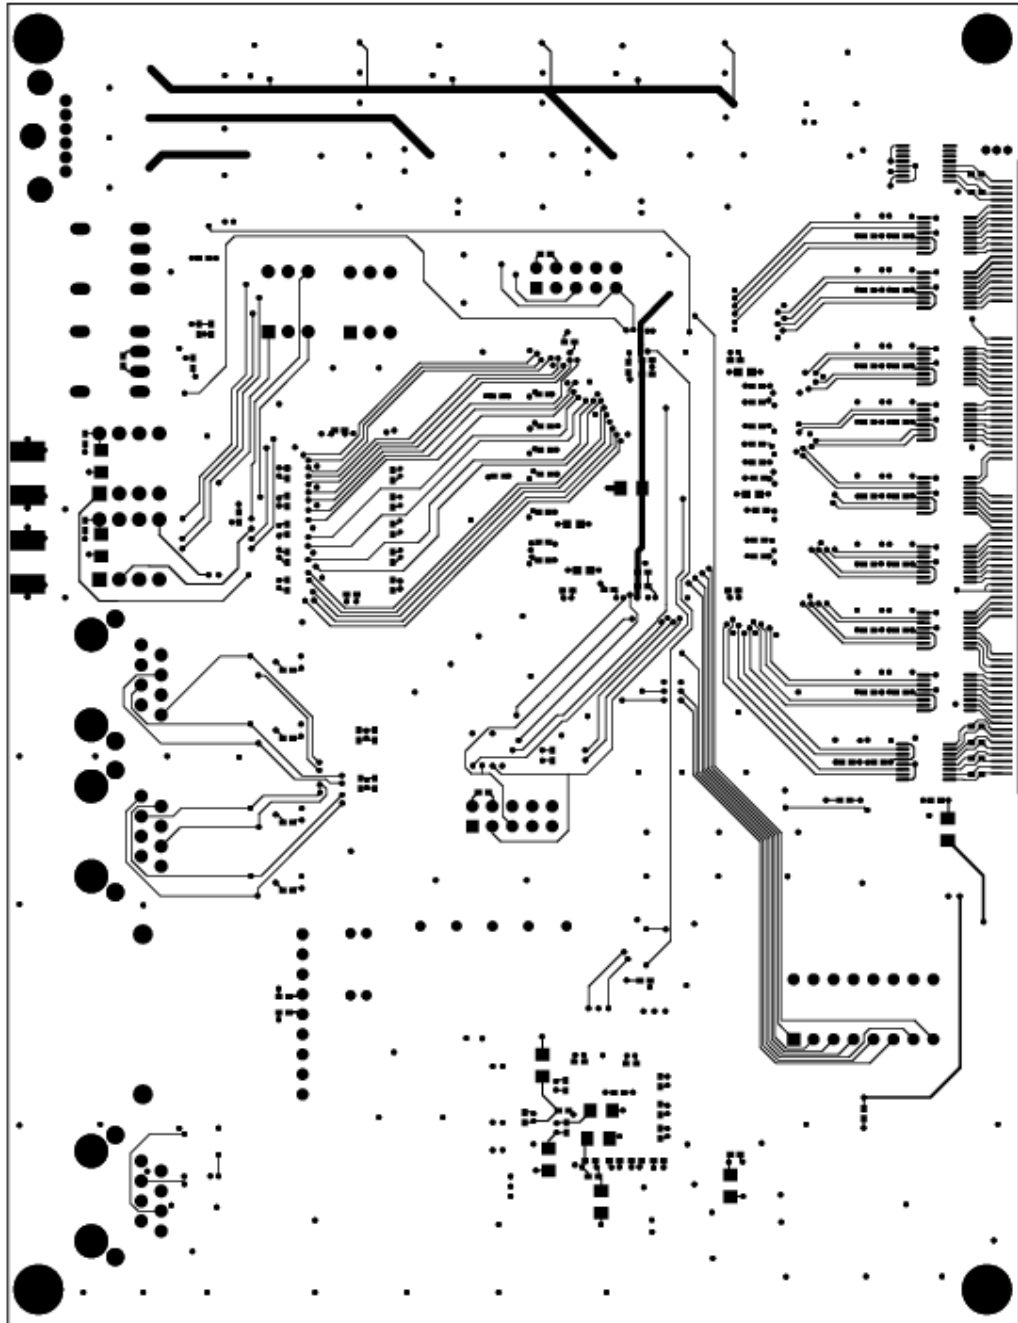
PCB layout for bottom routing layer (traces and pads).
